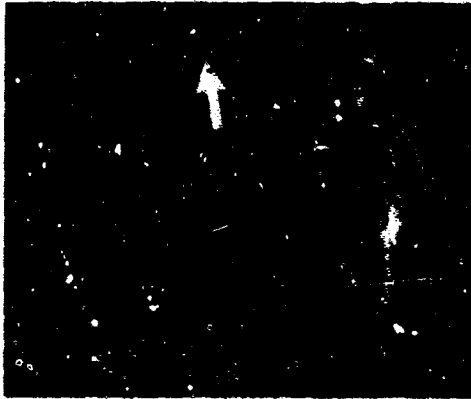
Fractograph Showing a Needle-Like Corrosion Product Completely Obscuring the Fracture Pattern.
